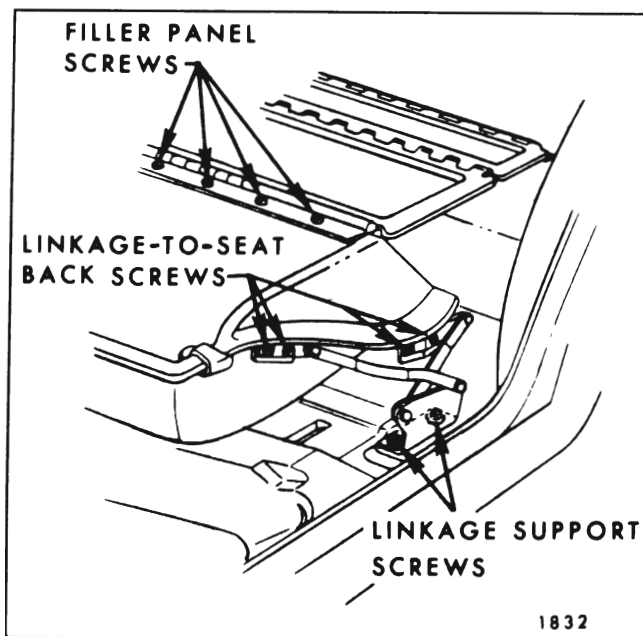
Folding Second Seat Back Linkage and Filler Panel
